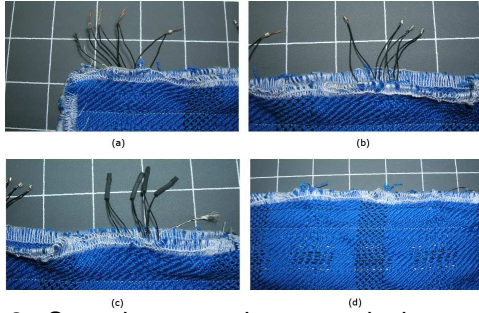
Steps in connecting networks between fabric pieces: (a) Stripped wires from each side of the seam connected are using jewelry crimp beads, (b) soldered, (c) insulated, and (d) tucked into the seam and the seam is sewn closed. The grid shown is 1 inch per square.
